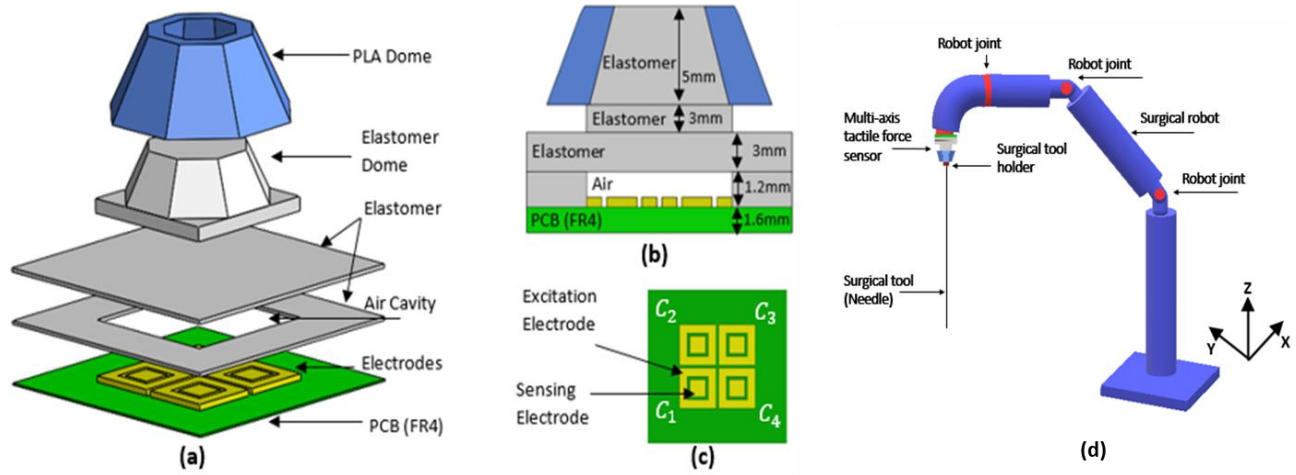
(a) Exploded view of the sensor (b) cross-sectional view of the sensor (c) sensing and excitation electrodes configuration (d) integration scheme of the sensor with the robotic arm and surgical tool.
